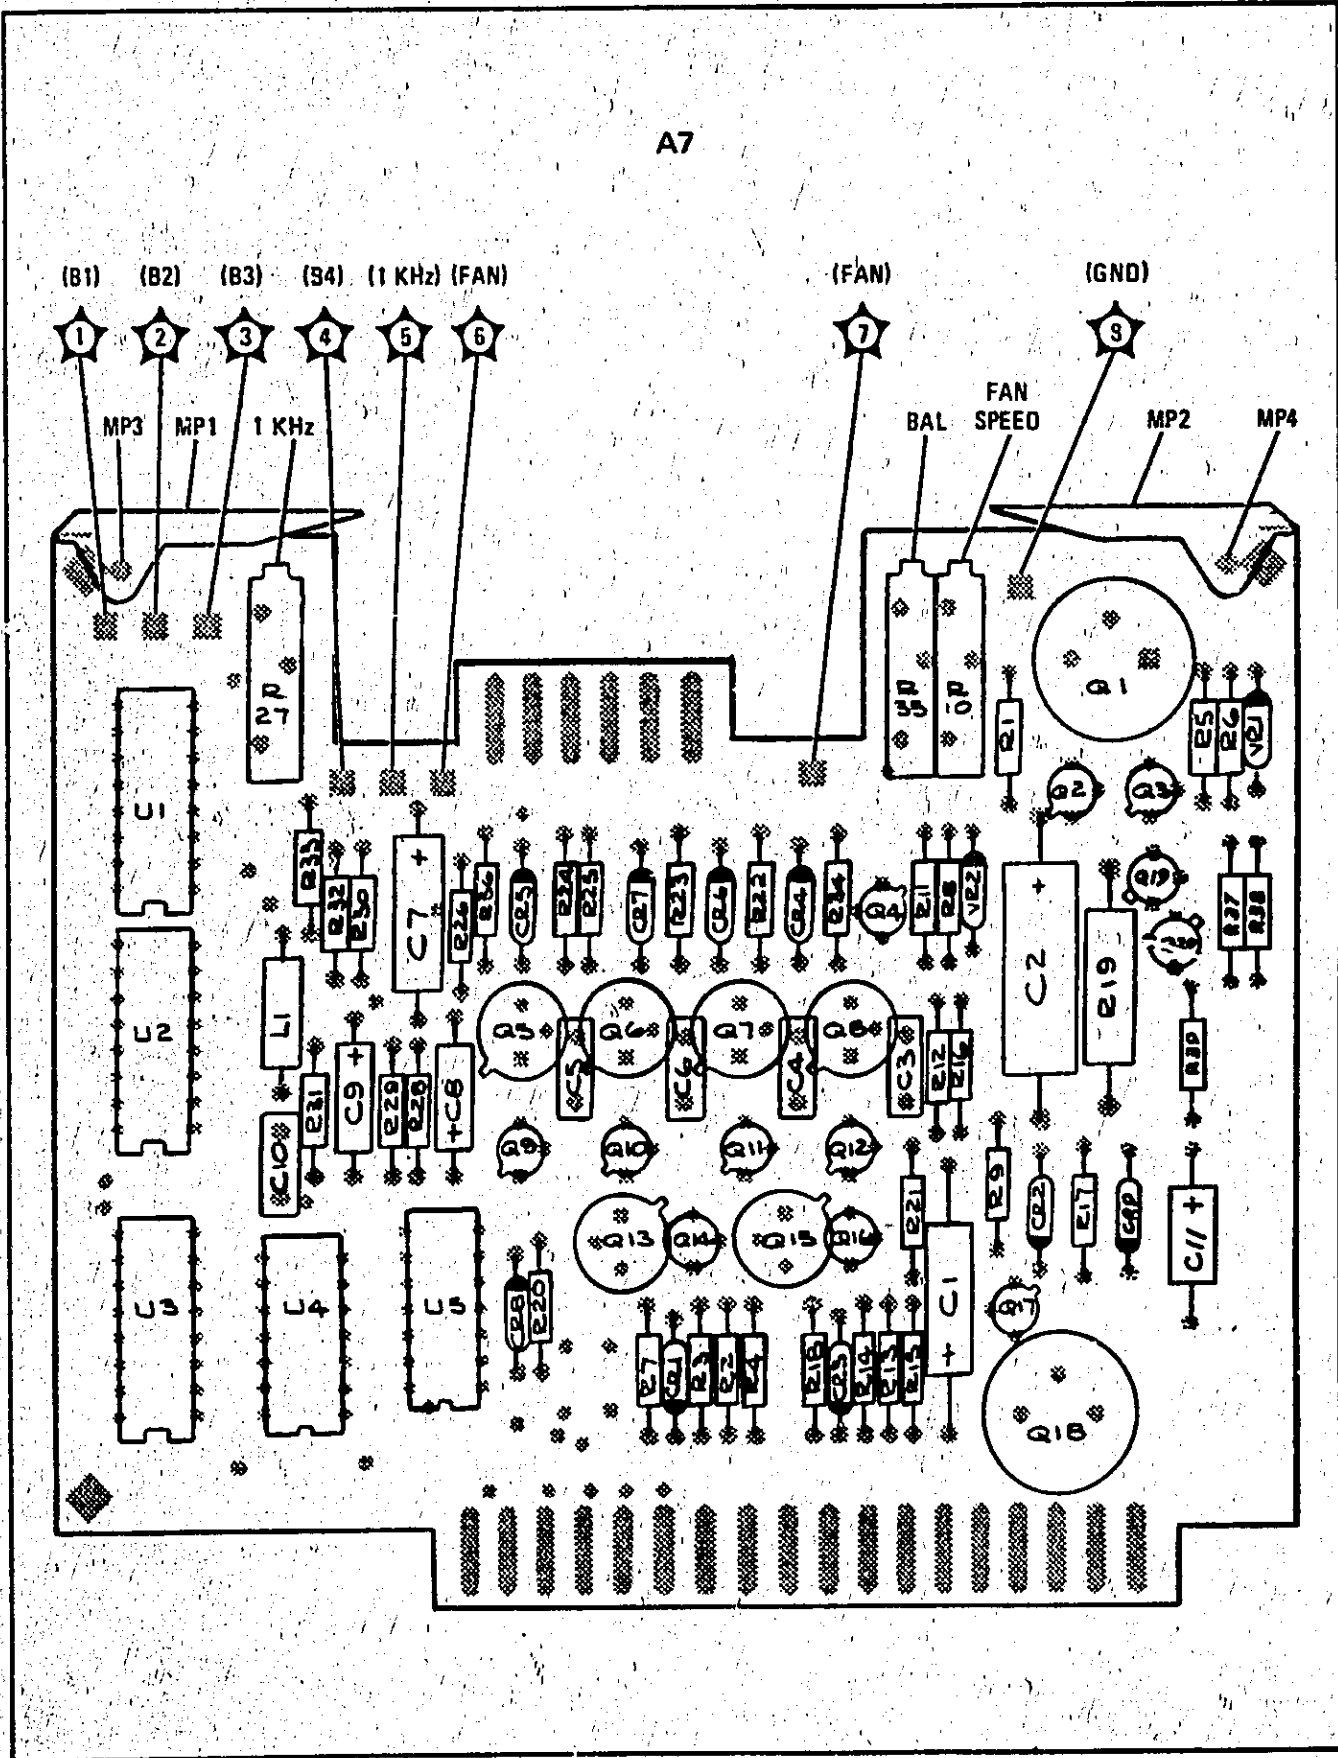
A7 Operations Control Assembly, Component Locations (CHANGE 4)
